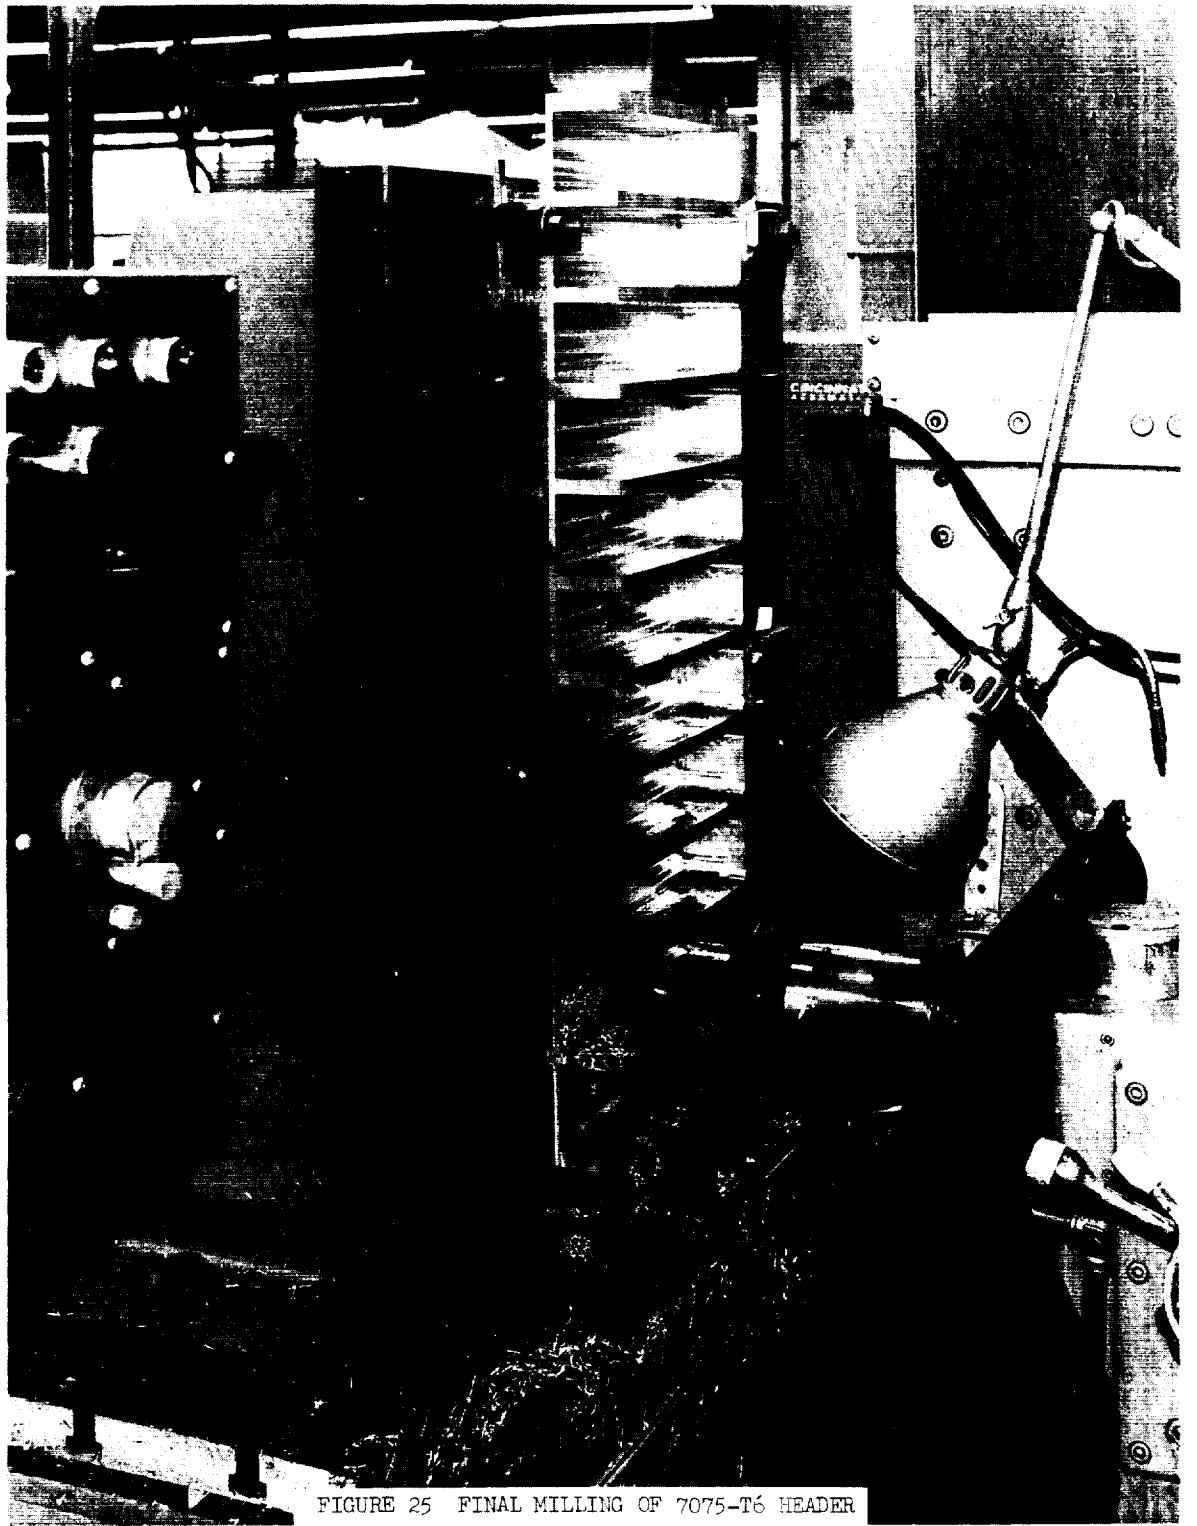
FINAL MILLING OF 7075-T6 HEADER
